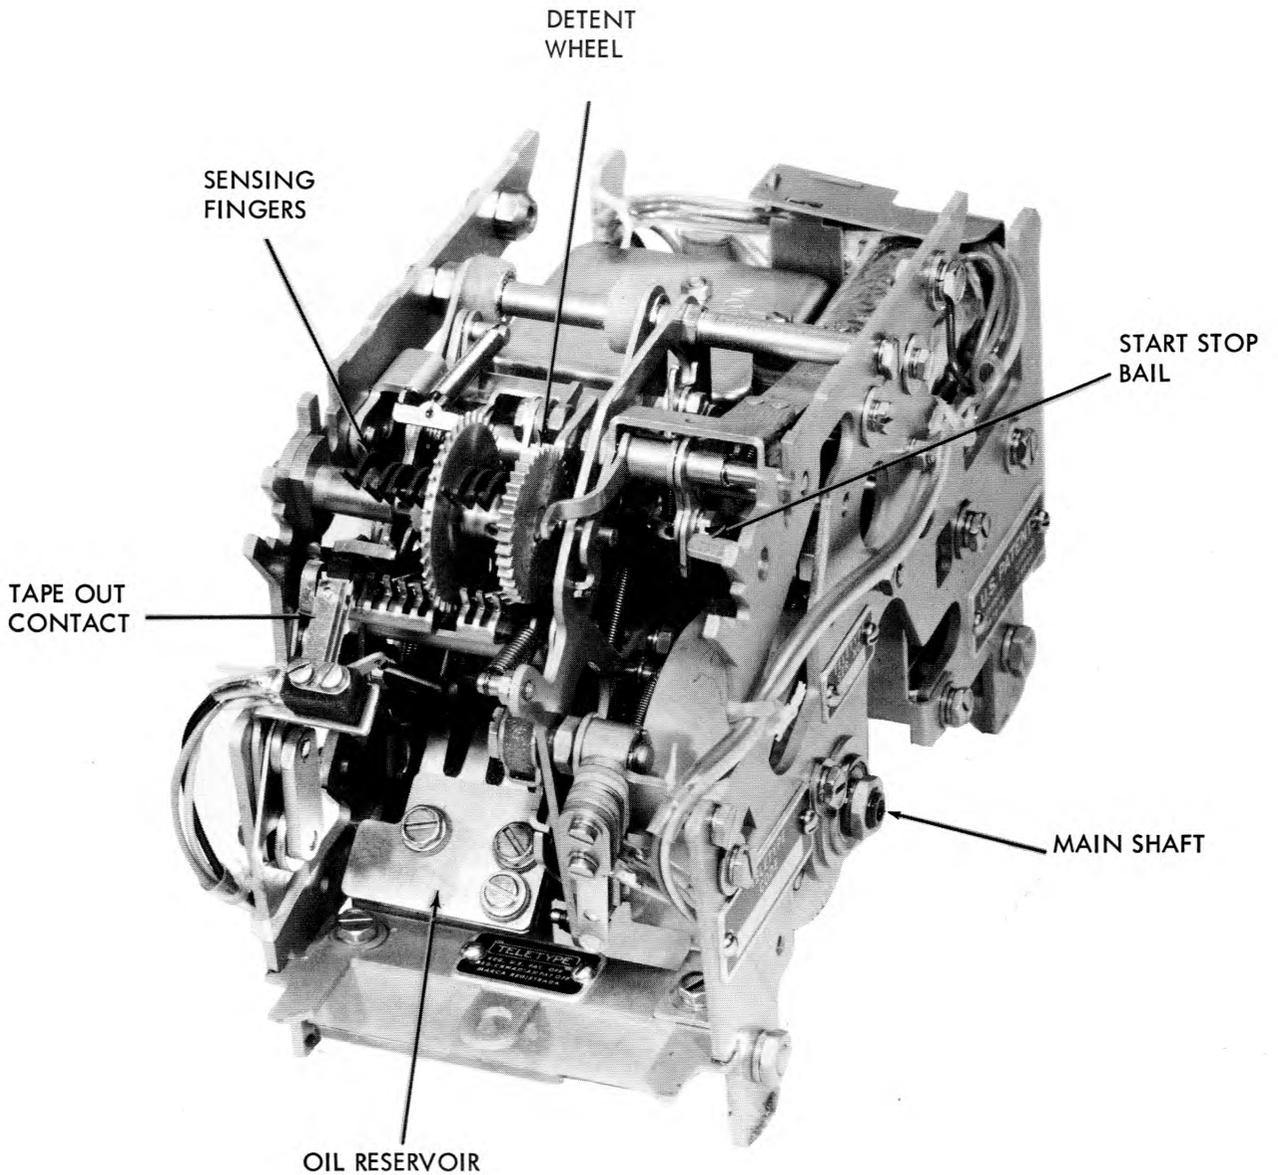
Transmitter Distributor, Covers Removed (End View)
